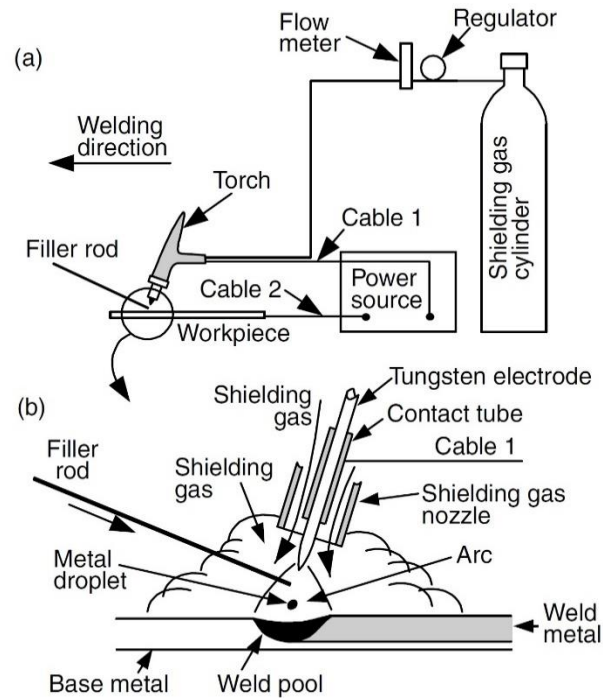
Gas–tungsten arc welding: (a) overall process; (b) weld zone [55]
